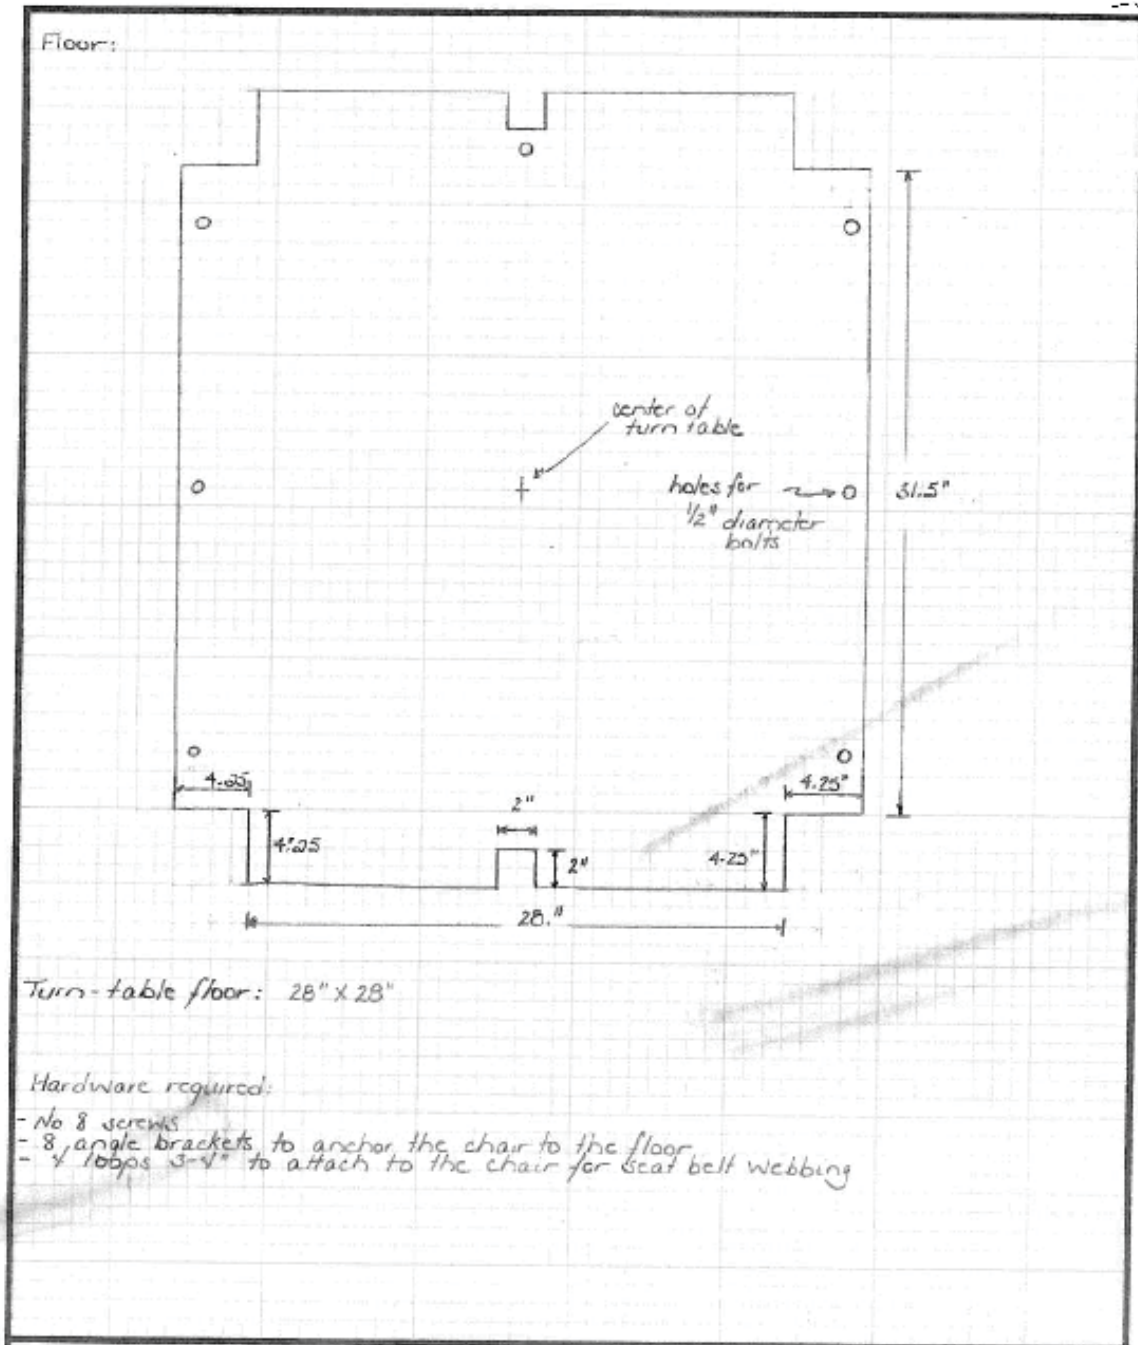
Dimensions and construction schematic for the occupant compartment of the swing fixture
